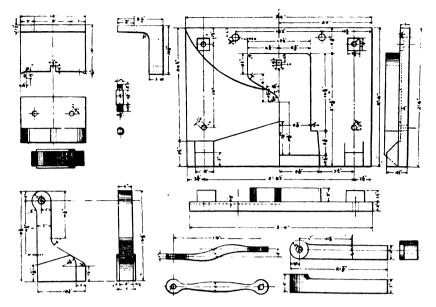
A FORMER FOR BENDING BRAKE BEAM SAFETY HANGERS
